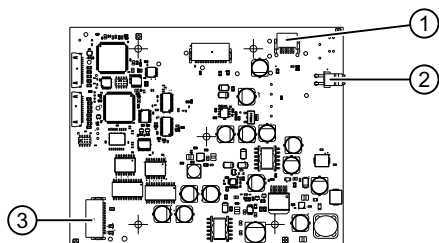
Analyzer module printed circuit board, interfaces OXYMAT 7
